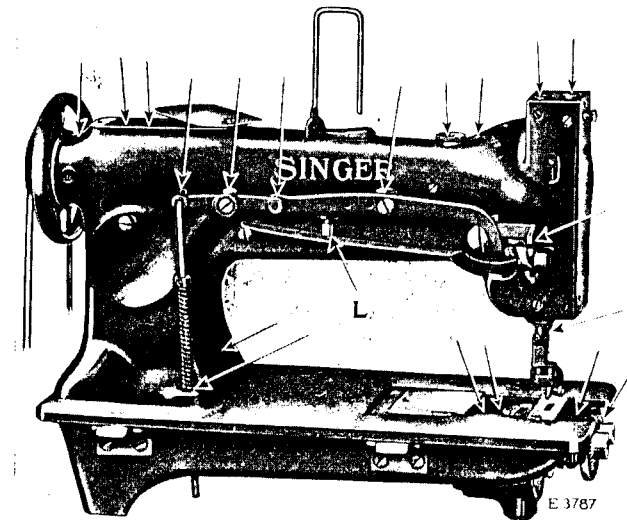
BACK VIEW OF MACHINE, SHOWING OILING POINTS
